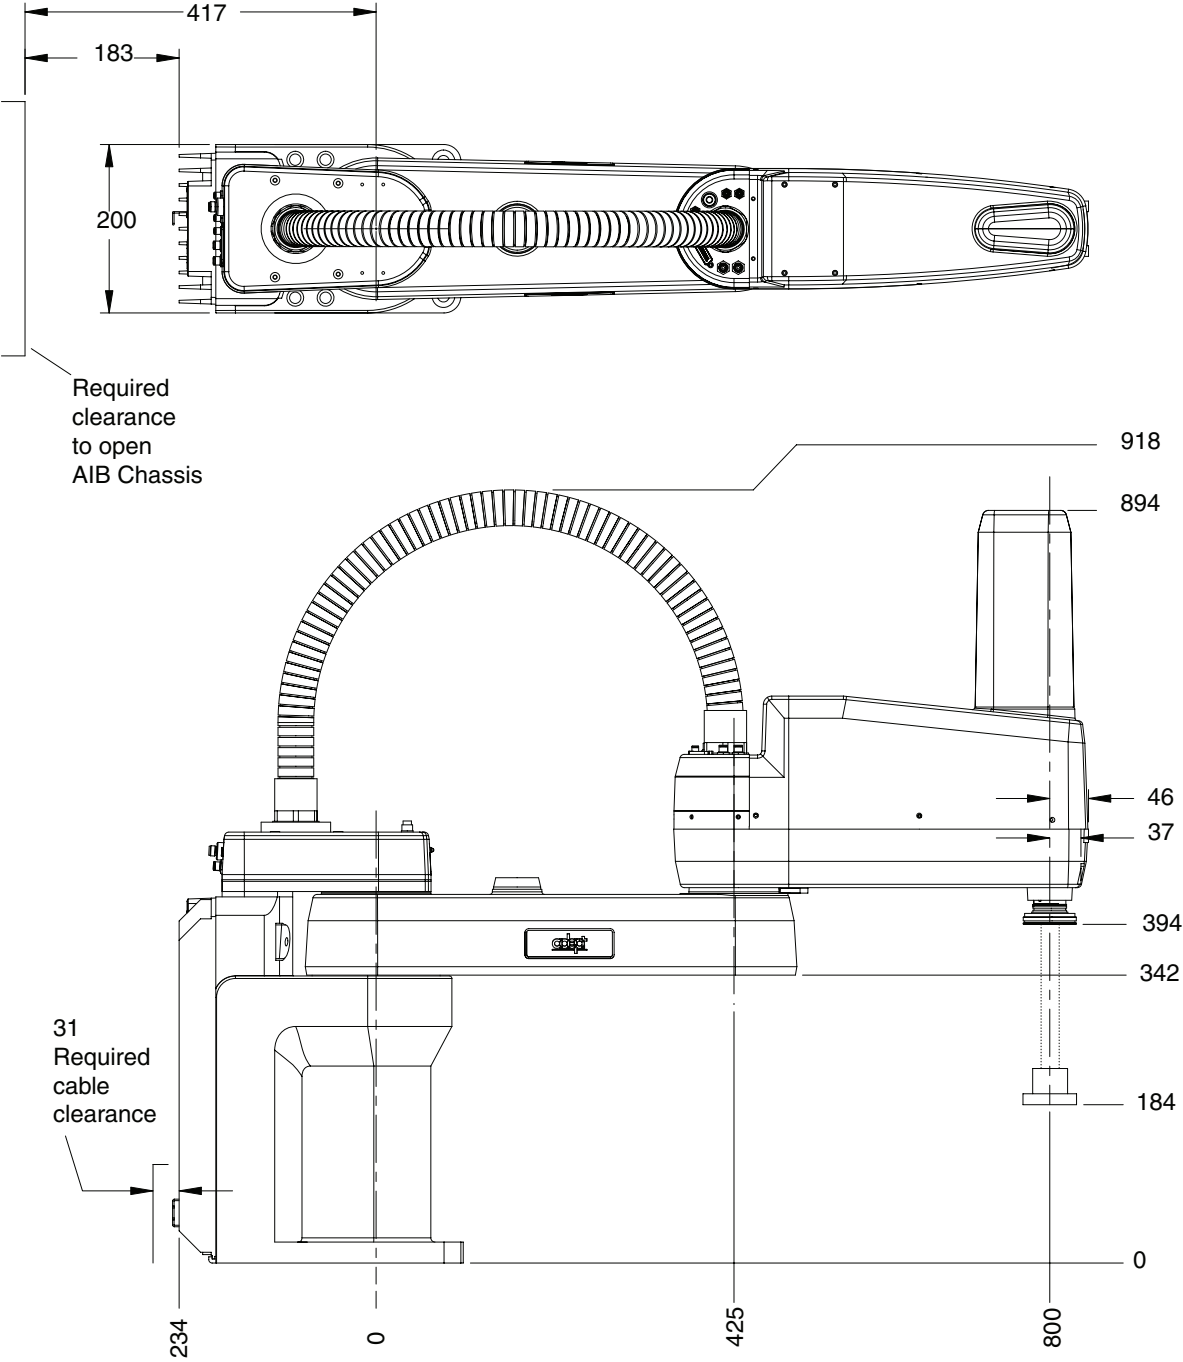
Adept Cobra s800 Robot Top and Side Dimensions
